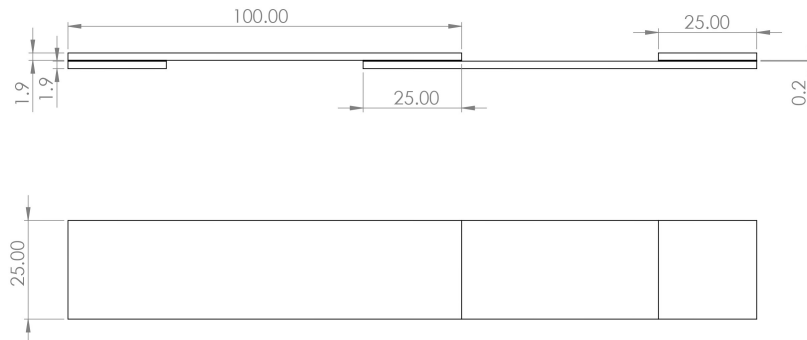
Schematic representation of the dimensions, in millimeters, of the single-lap adhesive joint specimen - side view and top view (from top to bottom).
